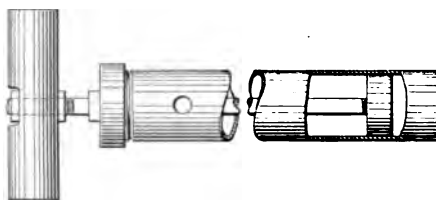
DEVICE FOR MOLDING TAMPING CARTRIDGES.
